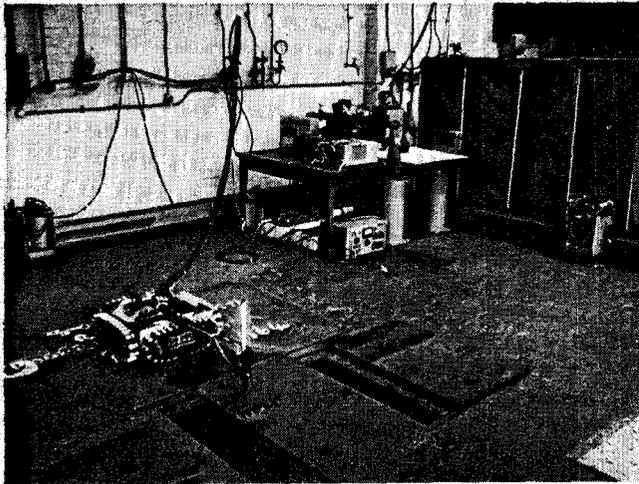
Automated optical-tooling procedure for cutting large steel plates by computer control.
